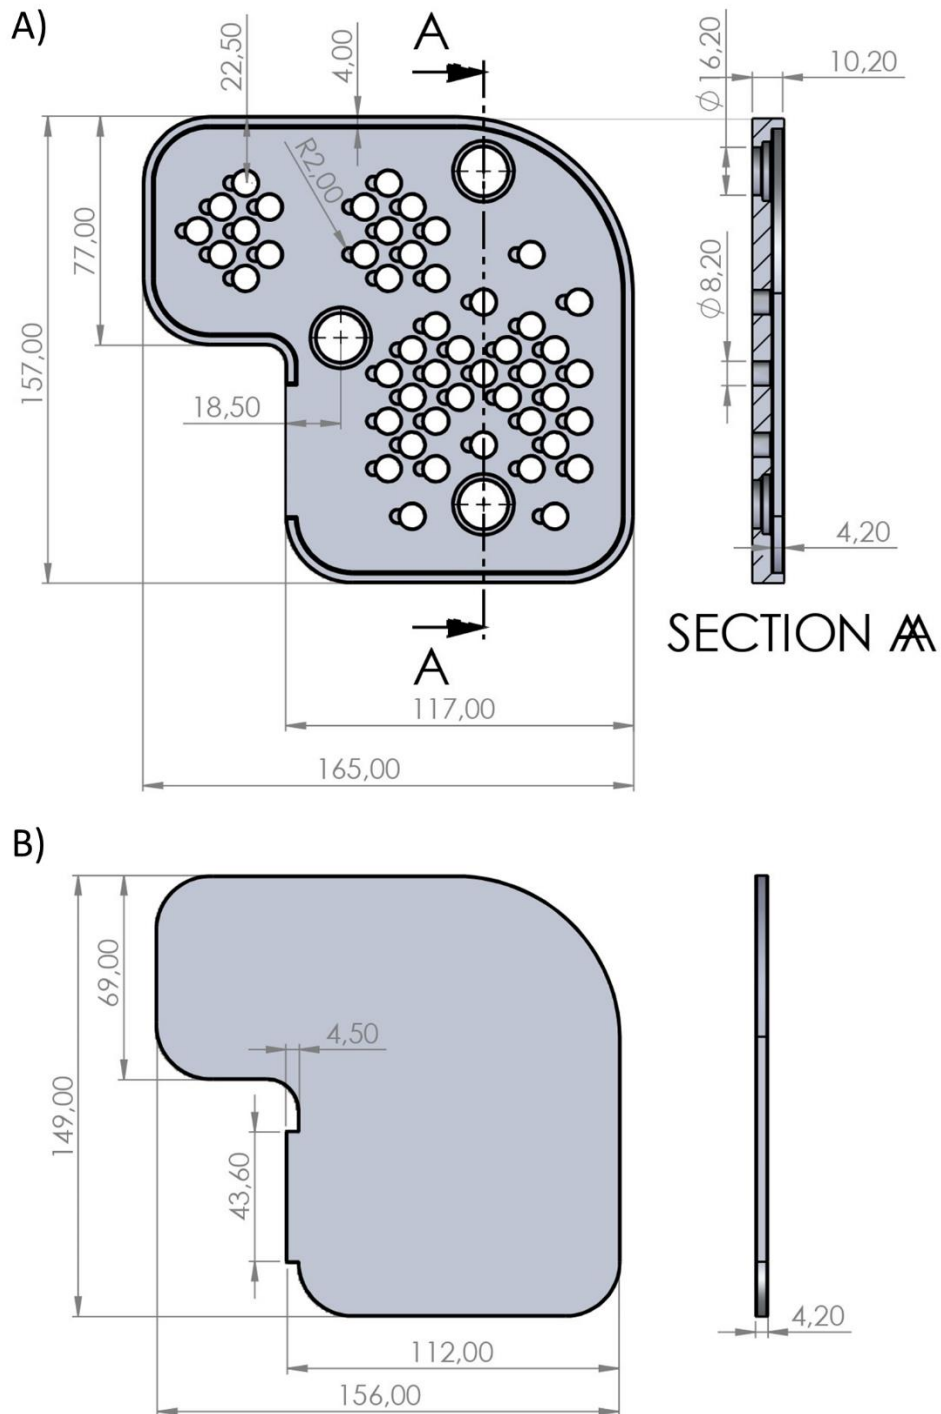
Dimensioned drawings of the case of the flexible PCBs in the “cluster” version. Panel A: housing, where the flexible PCB is inserted. Panel B: cover. All dimensions are expressed in millimeters.
